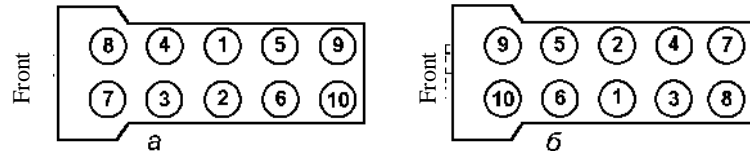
Sequence of tightening of bolts for fastening of cylinder block head:
